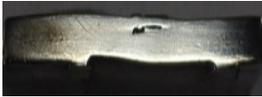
Photos of the cross section macrostructure on welded joint in a heating plate width of 10 mm.
